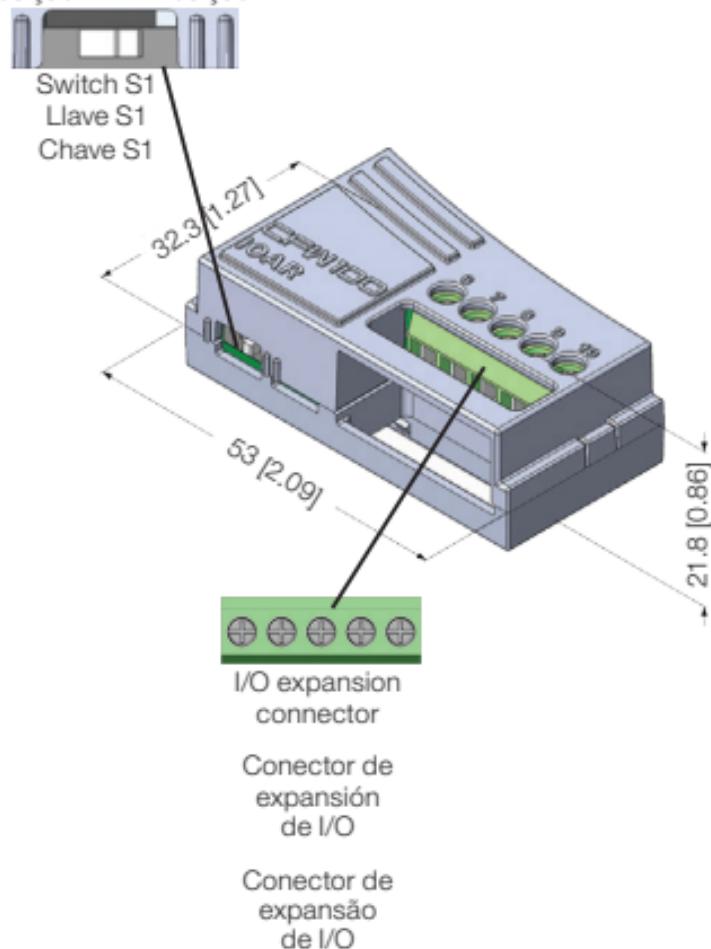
CFW100-IOAR dimensions in mm [in] and connectors location
